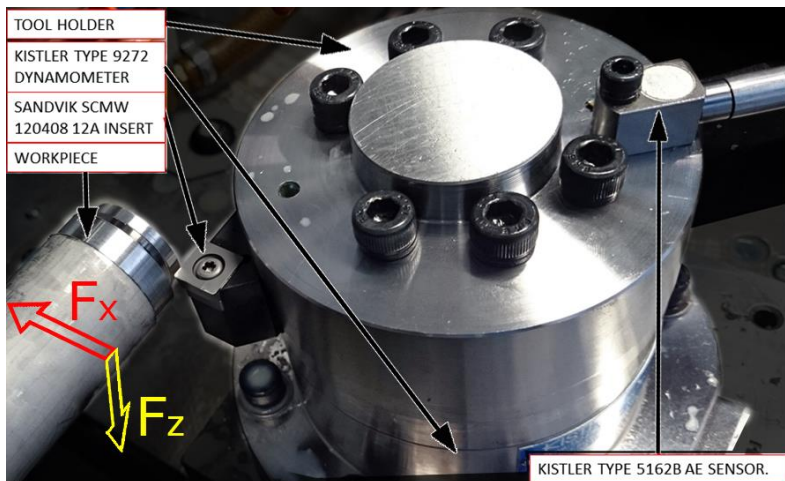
Orthogonal turning setup displaying dynamometer, tool, tool holder and the workpiece.
